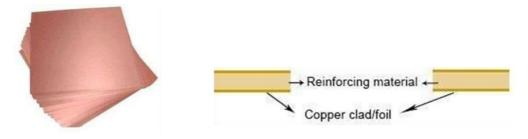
A set of CCL boards and the construction of a CCL board
